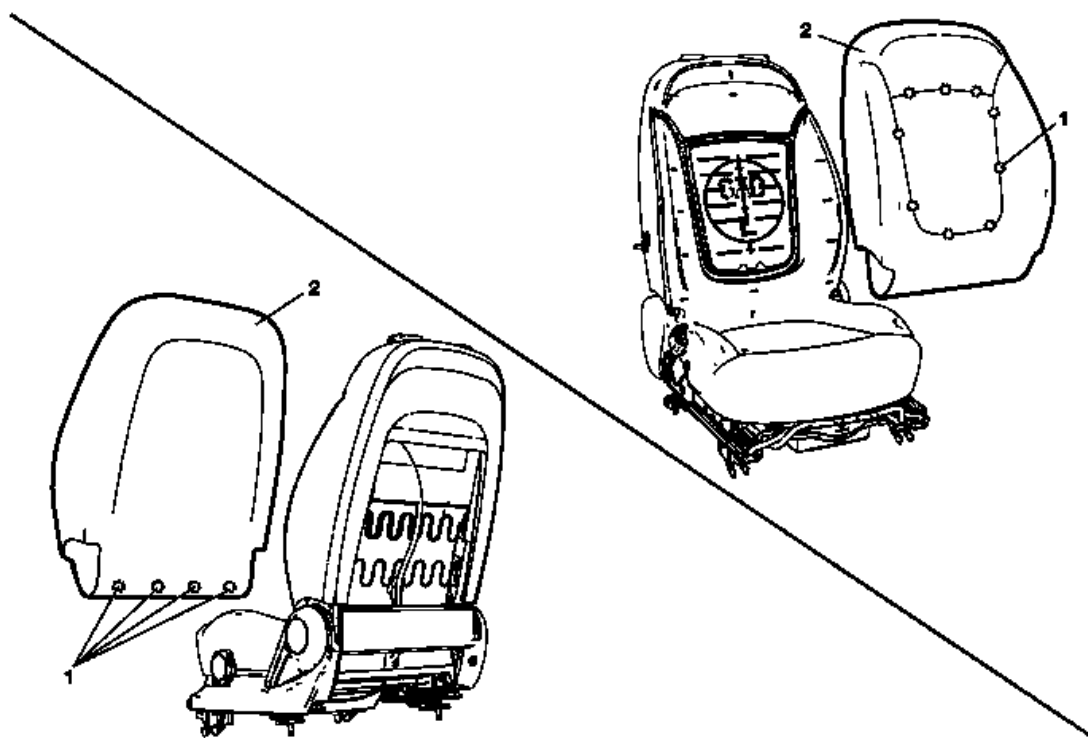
Driver or Passenger Seat Back Cushion Cover
